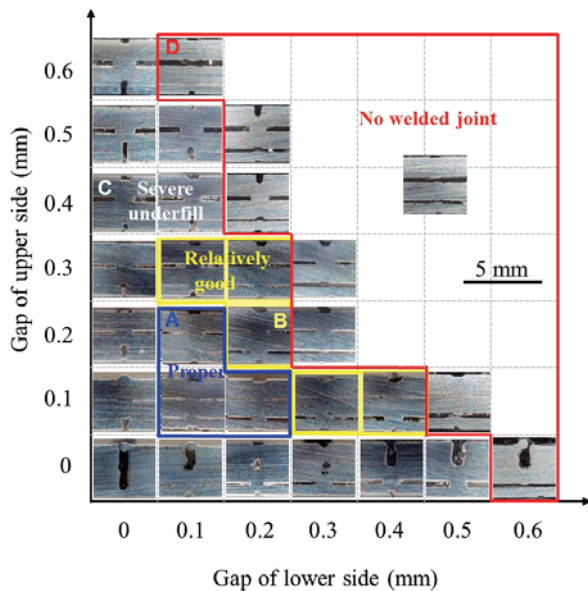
Cross-sectional photos of laser lap welds made in three zinc-coated steel sheets with different gaps at 4.5 kW laser power and 55 mm/s welding speed, showing formation of weld defects such as underfilling and porosity.
